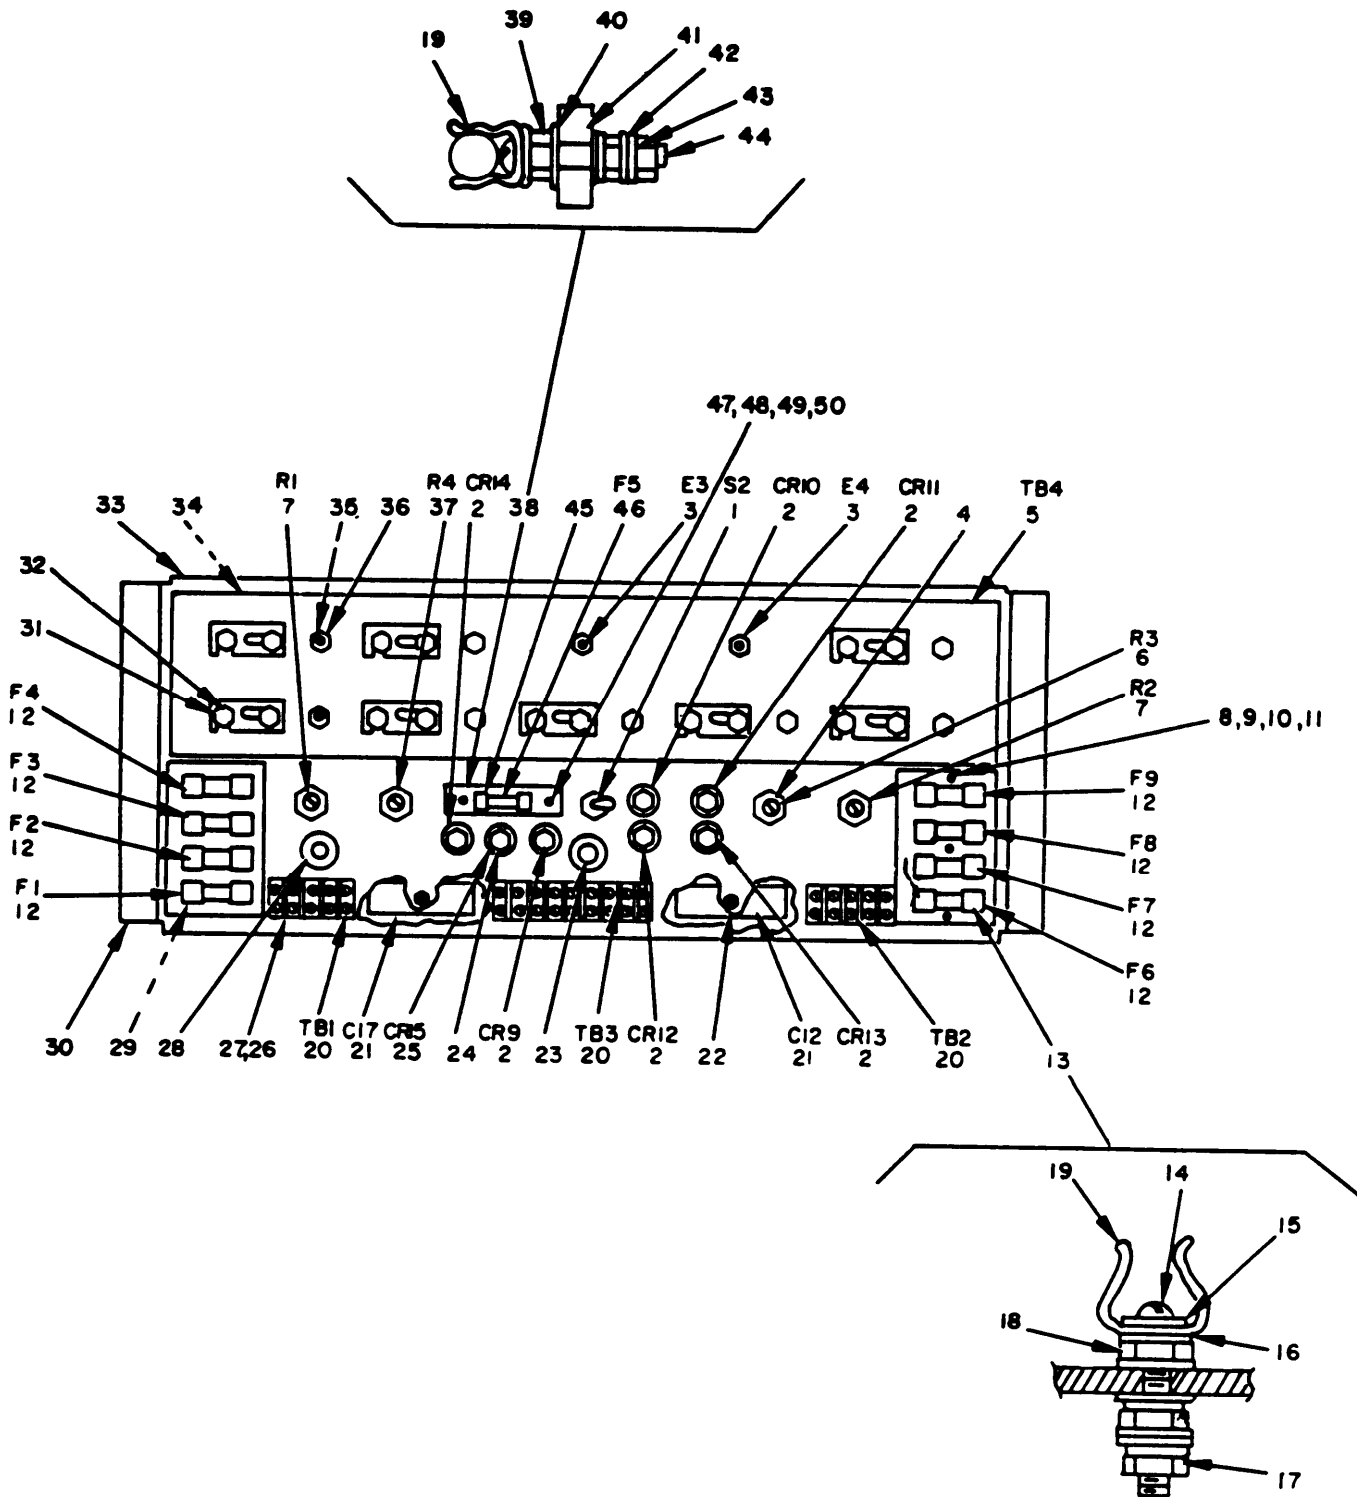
Charger, Battery PP-1451/G, Lower Front Subassembly.
